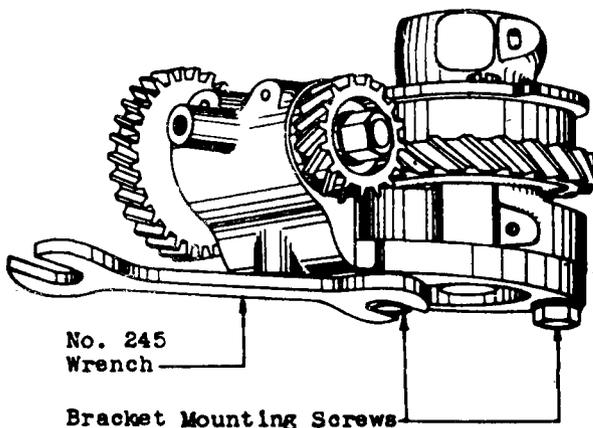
Adjustment of Counter-shaft Bracket to Obtain Minimum Back-lash Between Gears on 166 Type Interrupters
